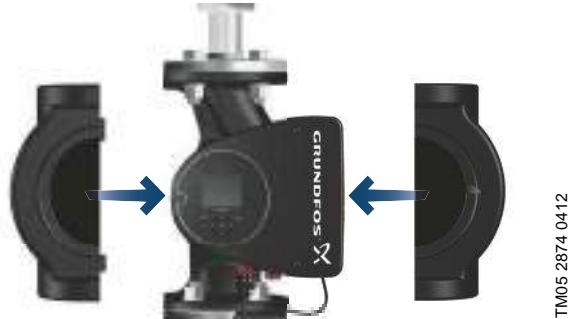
Fitting the insulating shells to a MAGNA3 pump
